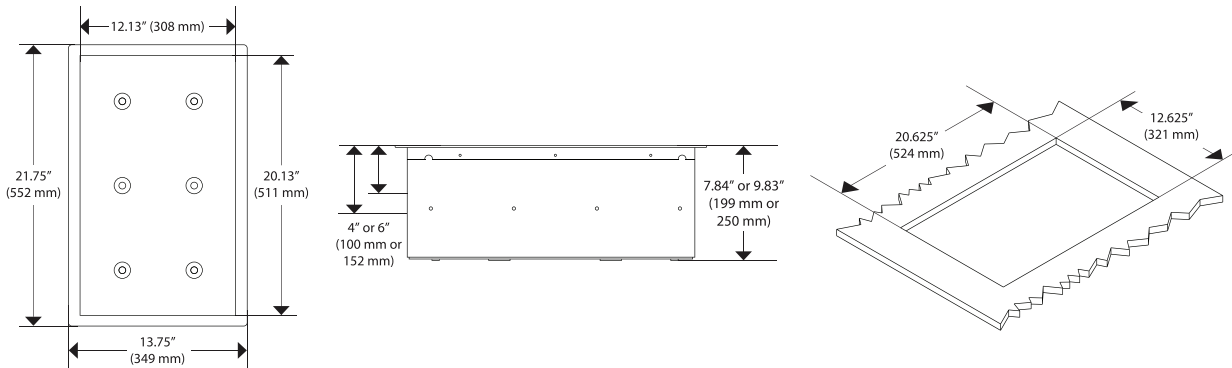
6-Sensor SinAqua Buffet Warmers (Top, Side, and Cut-Out Views)
